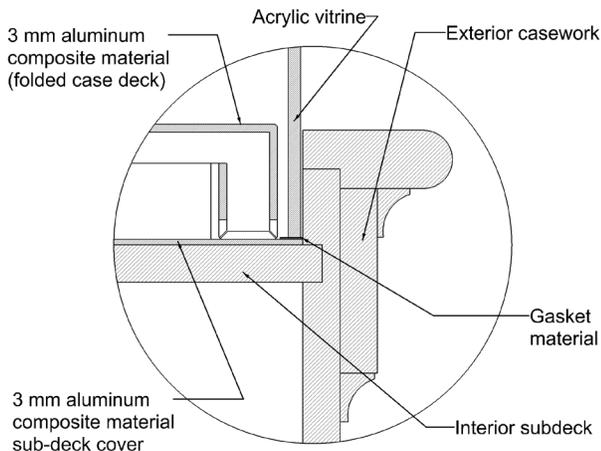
Detailed cross-section of retrofitted exhibit case showing typical construction, including aluminum composite subdeck cover, case deck, gasket, and acrylic vitrine exterior housing.
